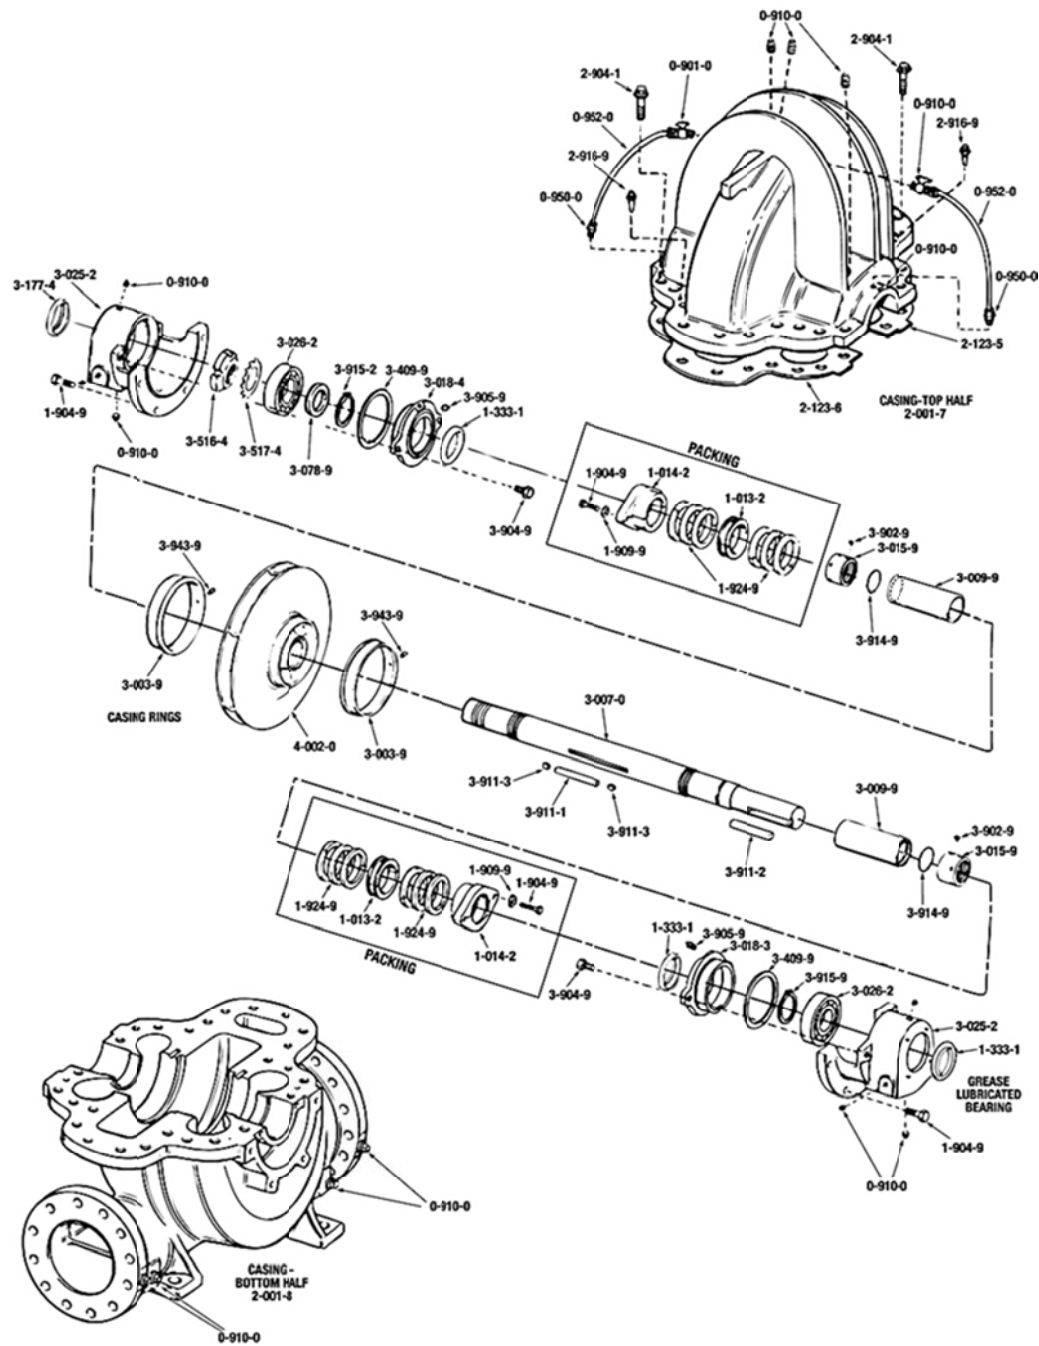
Exploded view of 9100 Horizontal Split Case Fire Pump
